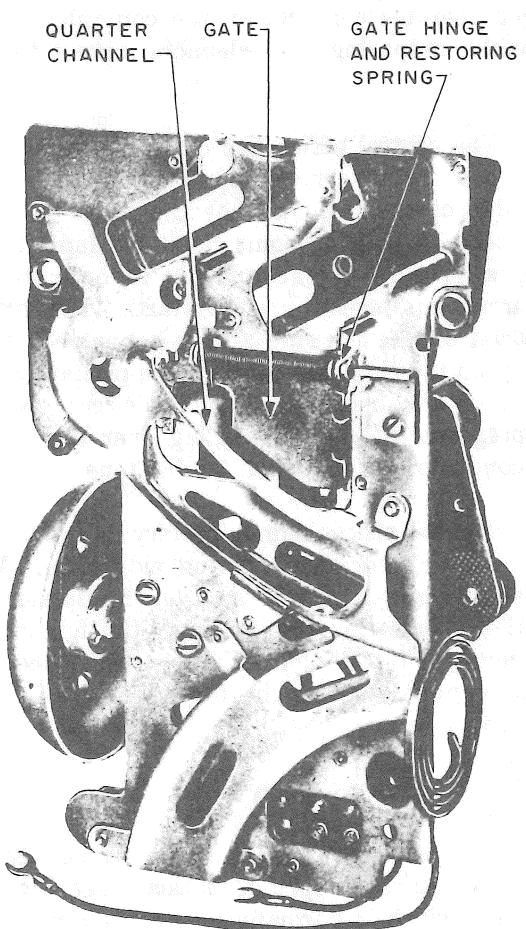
Coin First Coin Chute Assembly Equipped With P-339098 Cutover Clip For 5-Cent Service
